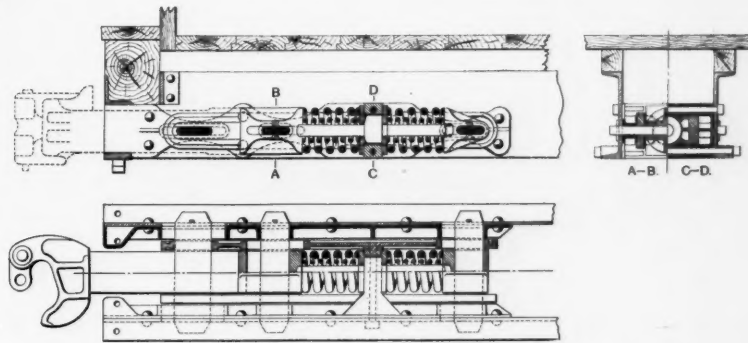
Farlow Tandem Spring Draft Gear, Class D.
